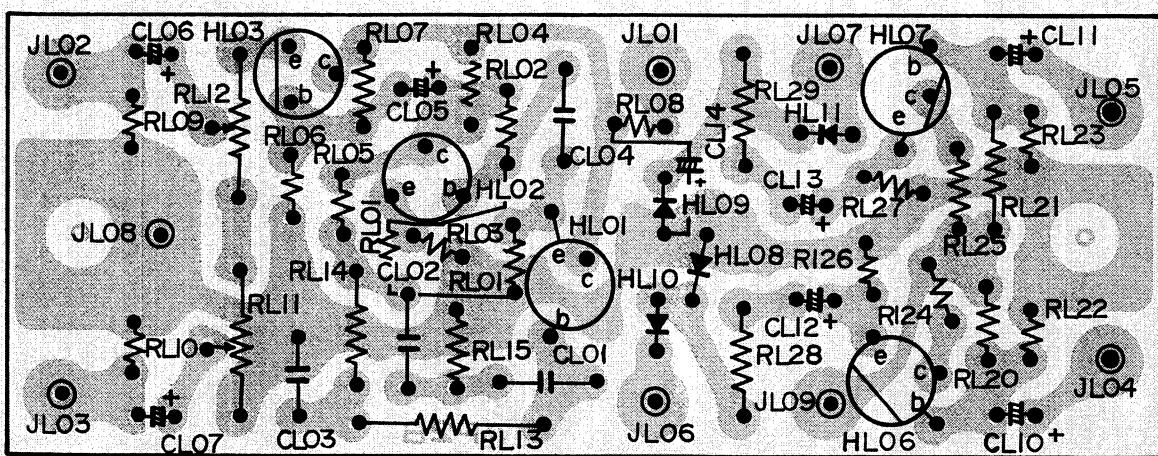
400Hz Tone Assembly PL01 Component Locations
